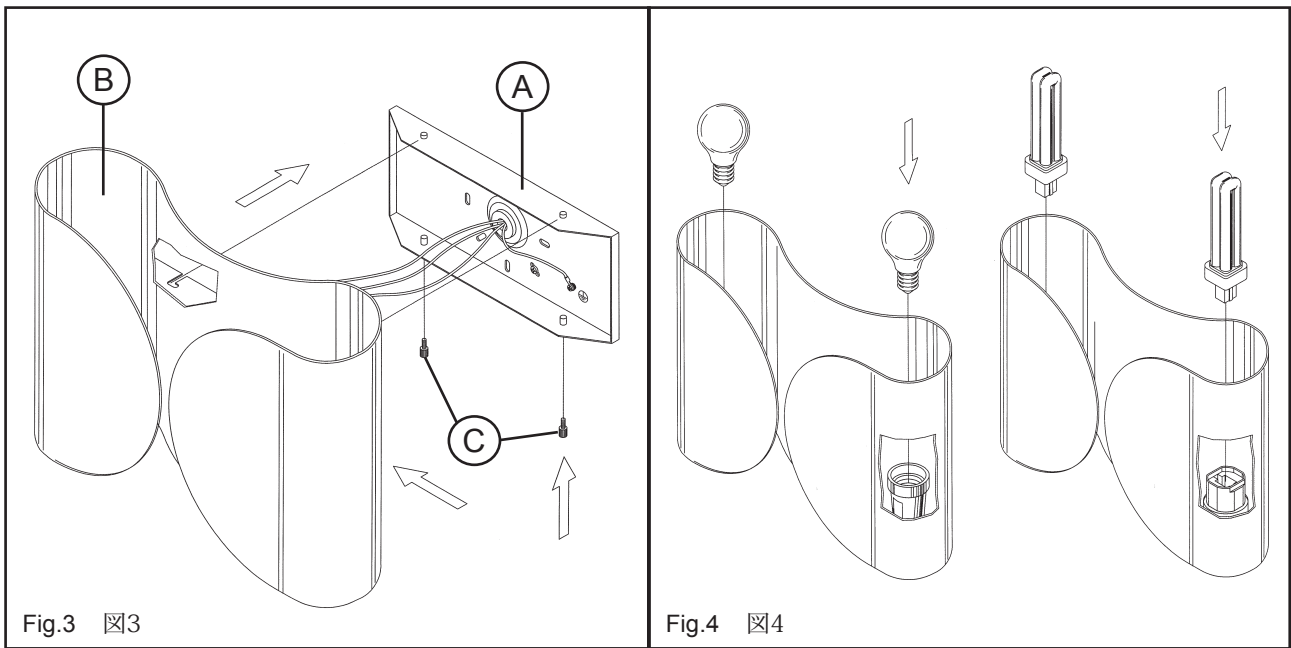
Reassemble the body (B) to the mounting plate (A) and fix it screwing up again the two threaded pins (C).
